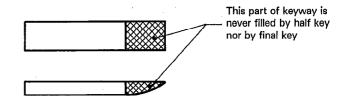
Shaft keyway¹⁾ machined with a key slot cutter
